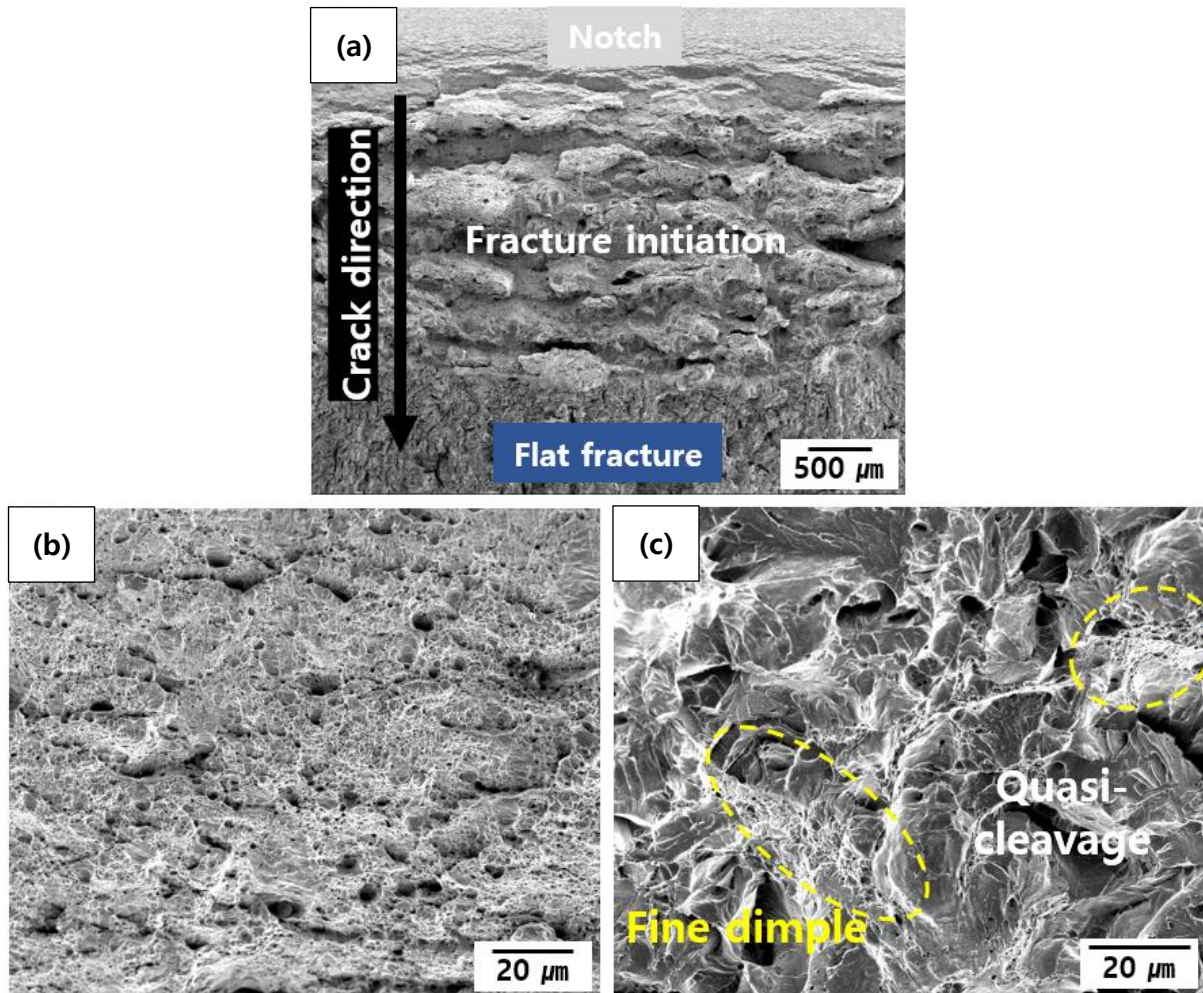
SEM fractographs showing (a) overall fracture appearance, (b) fracture initiation region and (c) flat fracture region of BM Charpy impact specimen
